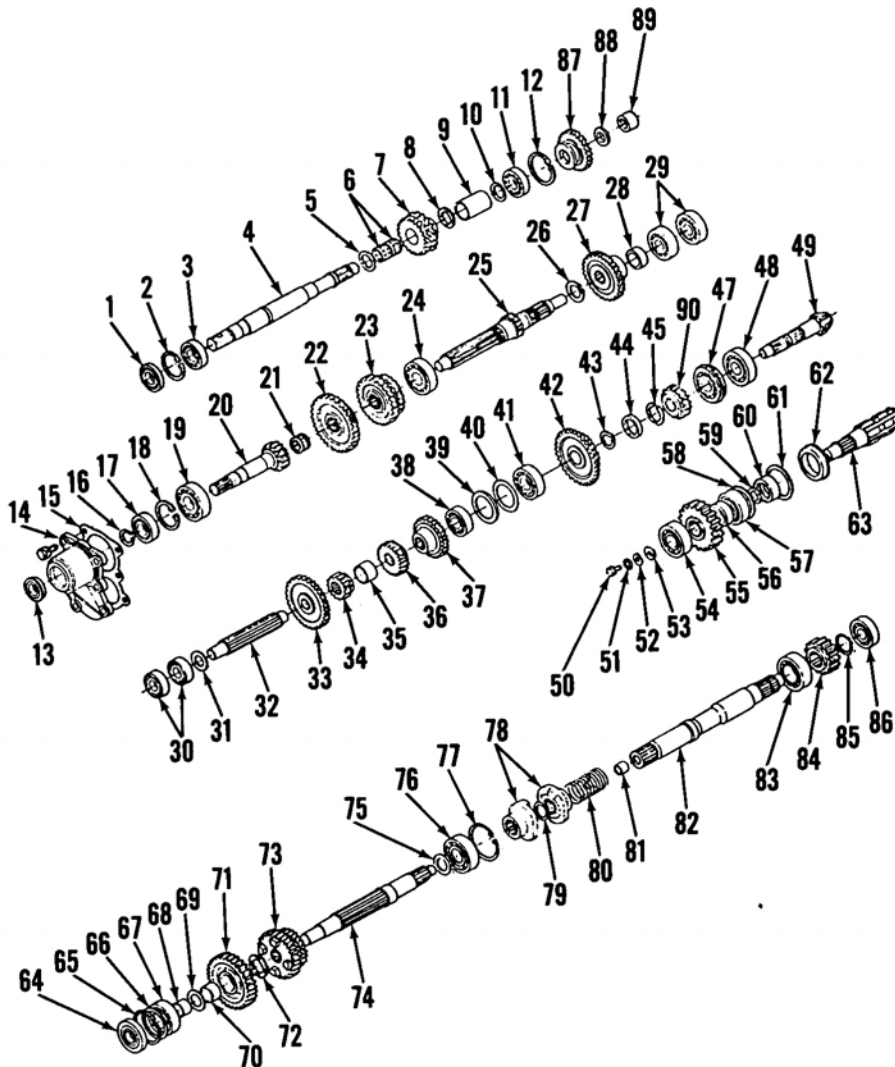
Exploded view of transmission gears, shafts and other components used on Models B6100D and B7100D. For identification of parts, refer to legend in Fig. 77 except for the following front-wheel drive components.
